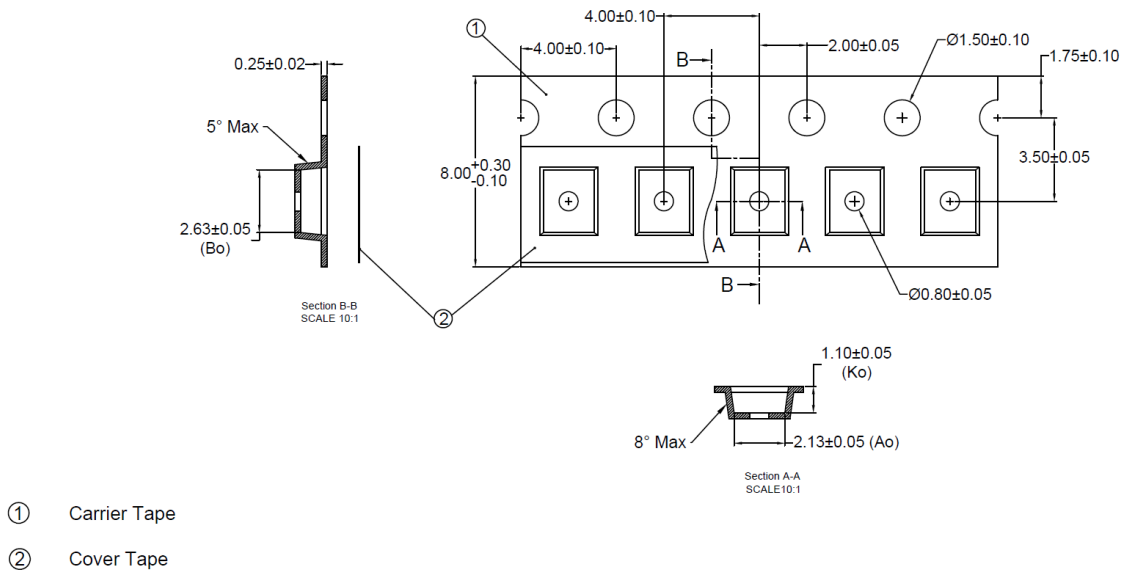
Pocket tape dimensions for LUXEON FX2-L PC Amber
